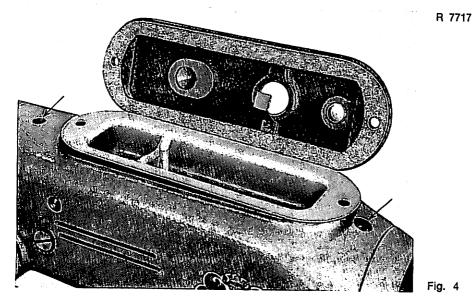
shows the open oil reservoir with oil wick, Fig. 5 the bottom of the reservoir with the lower end of oil wick D which protrudes into hole A and supplies oil to the arm shaft center bearing.
